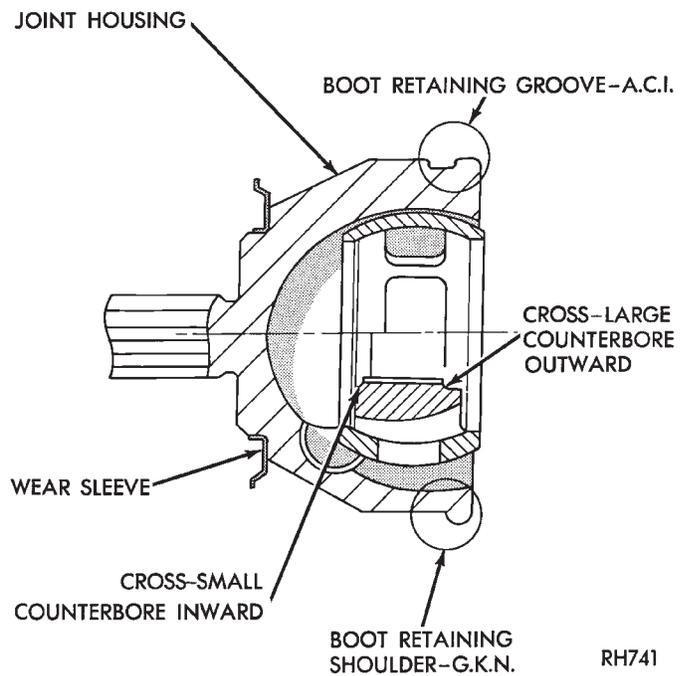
Cage & Cross Installed in Housing G.K.N.
